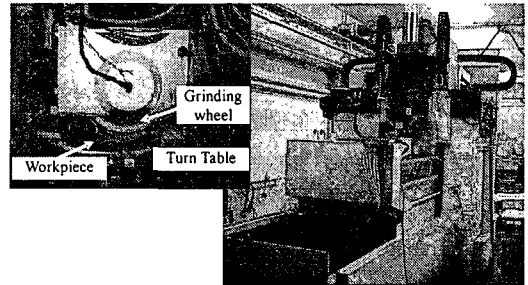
Ultra precision large-sized 4 axis machining machine using in grinding of zerodure mirror Φ 300mm
